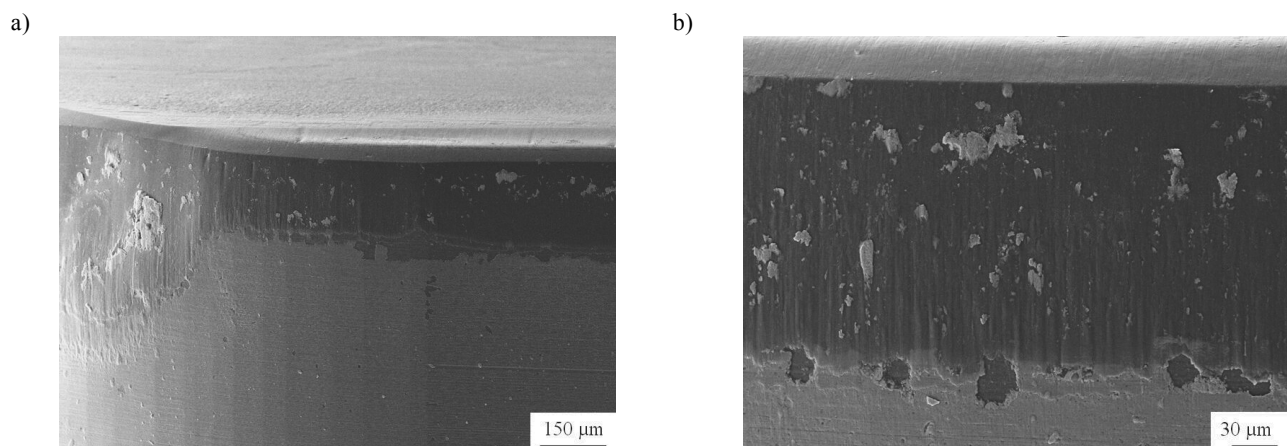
Width of the VB tool flank for sialon tool ceramics with: a) Ti(B,N) coating - after 5 minutes of machining and b) (Ti,Zr)N coating -after 5.5 minutes of machining
